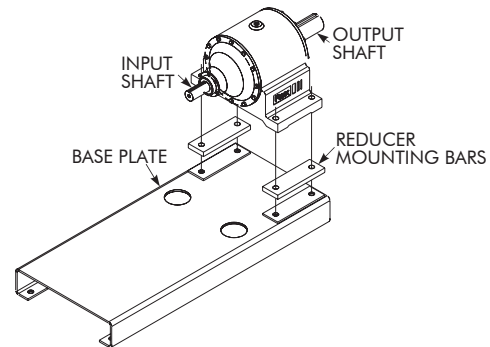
A — Aligning Reducer Mounting Bars to Baseplate Holes
